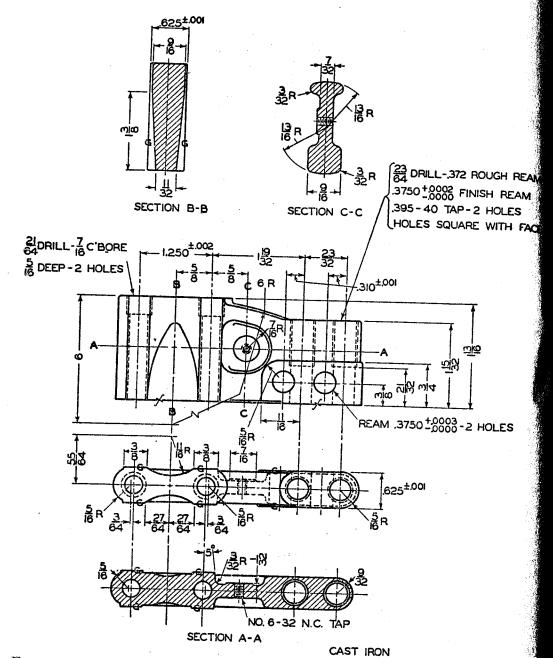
Adjustable length gage, detail of length gage head, progressive model.
